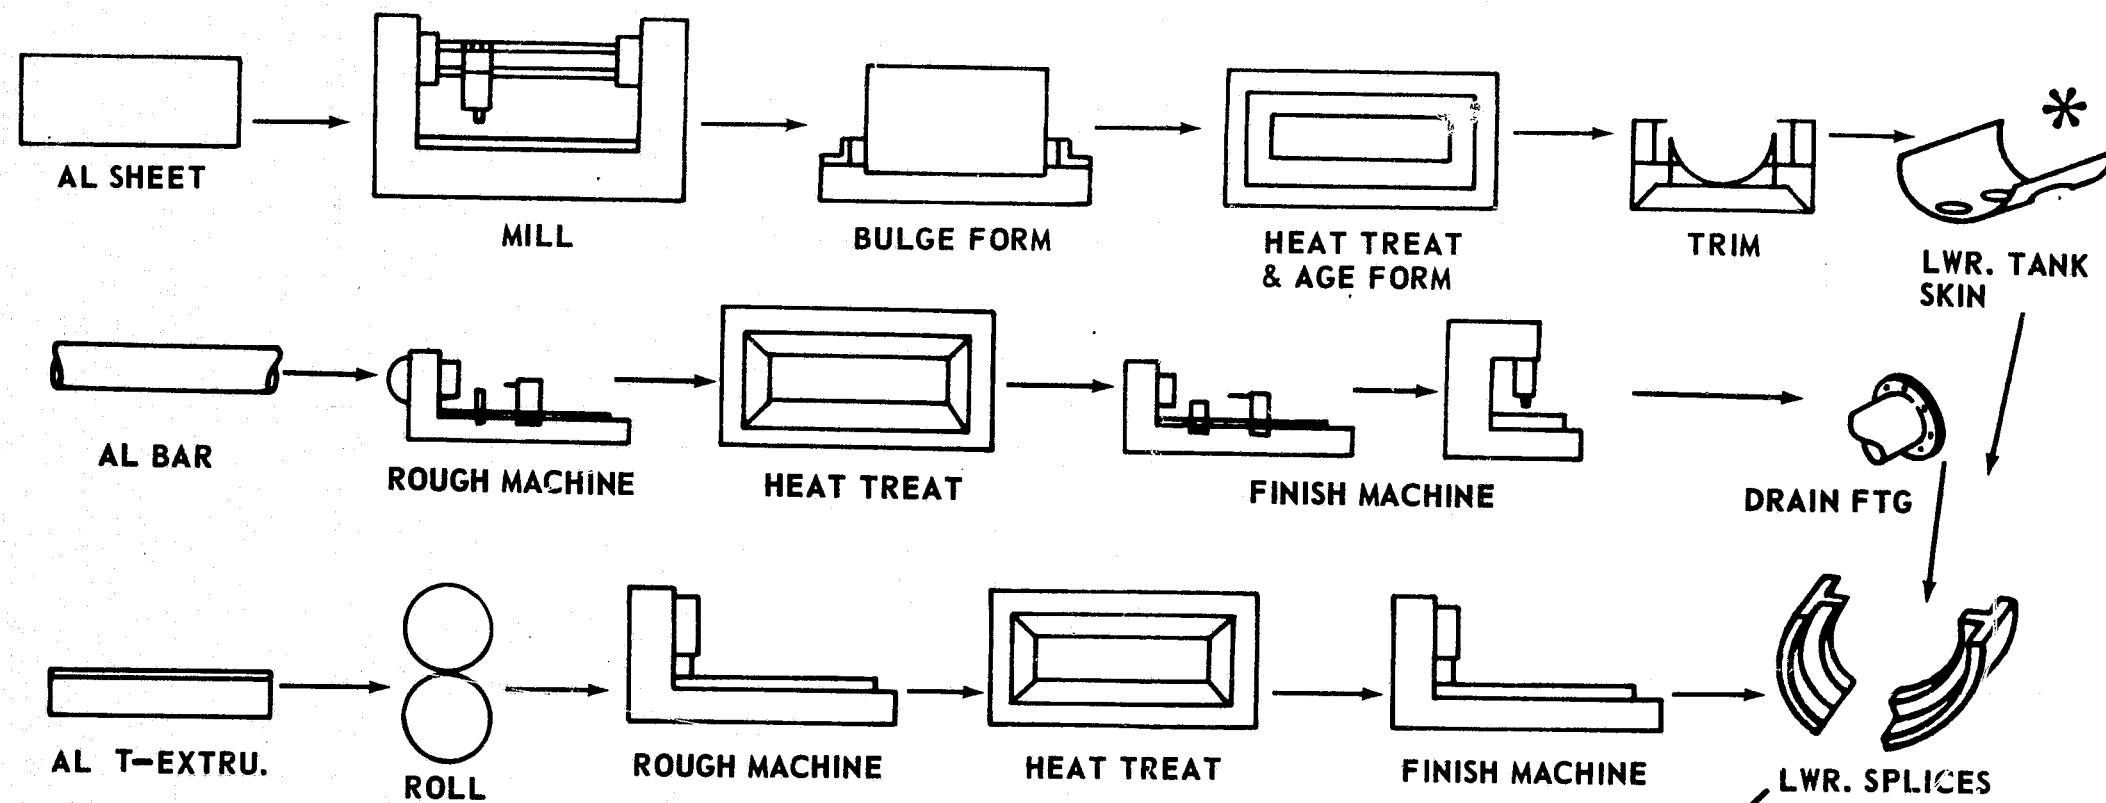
LH₂ MANIFOLD RING ASSEMBLY SEQUENCE
